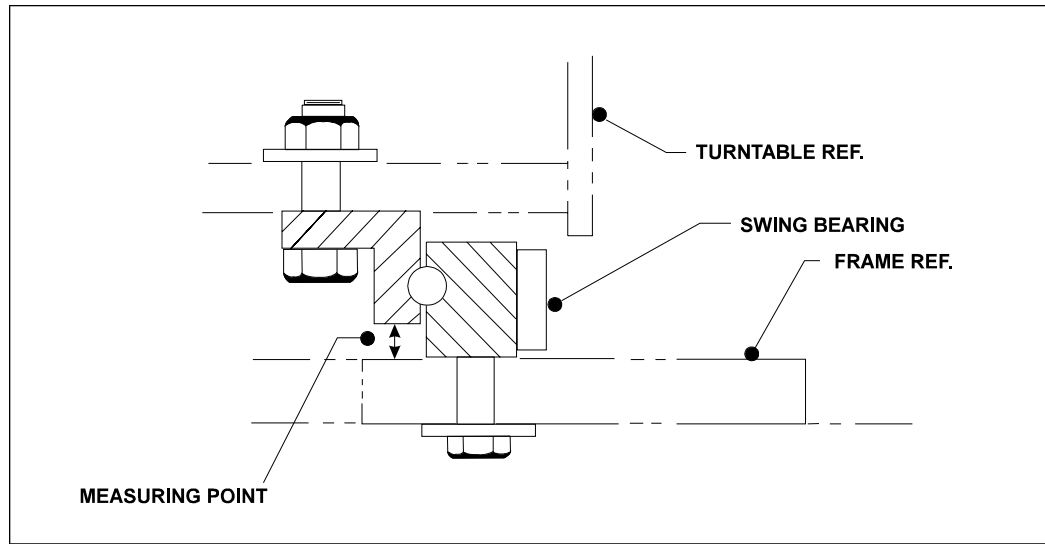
Swing Bearing Tolerance Measuring Point
